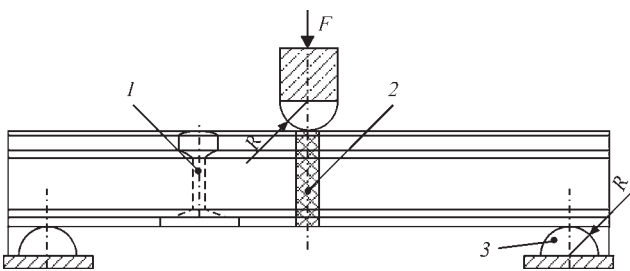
Scheme of testing the welded butt joint for static mechanical bending (F — force; 1 — side view; 2 — weld; 3 — support)
